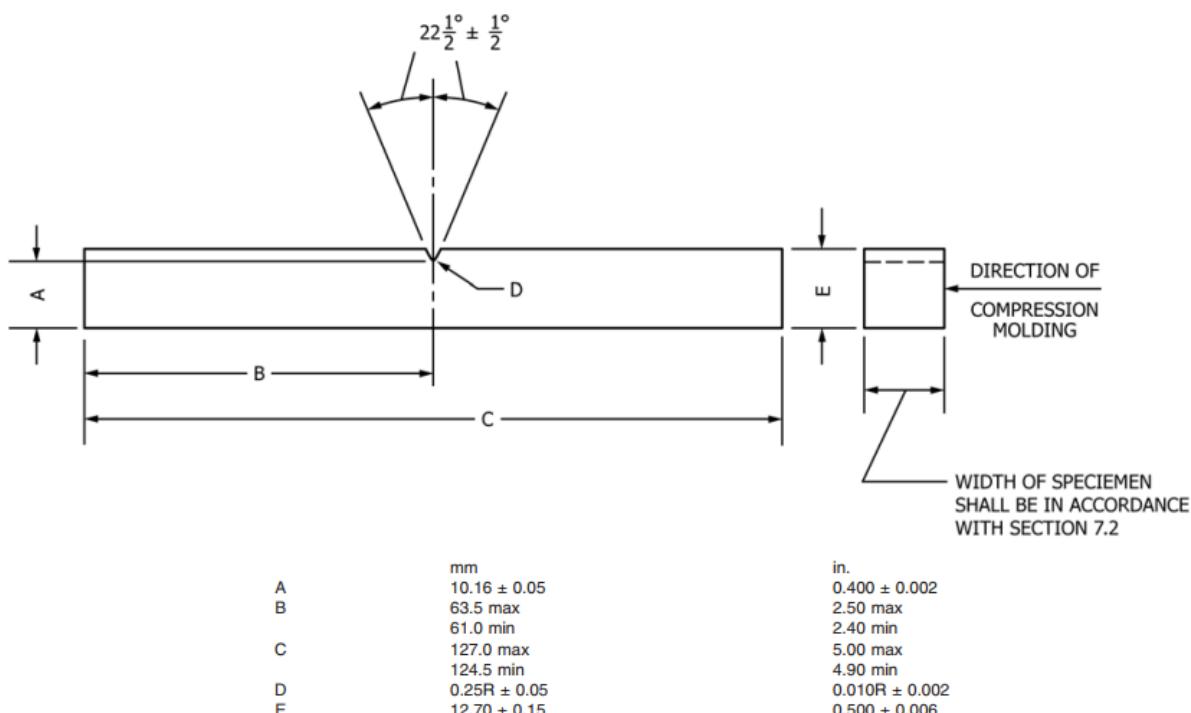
Dimensions of Simple Beam, Charpy Type, Impact Test Specimen (ASTM D6110)
